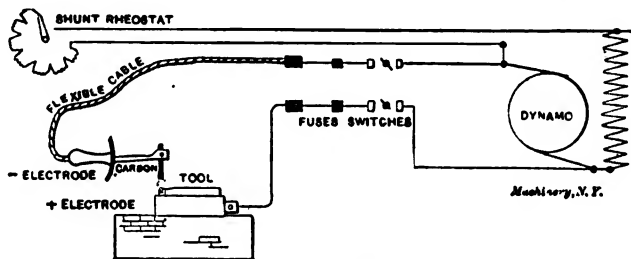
Apparatus for Heating Tools by the Electric Arc.
